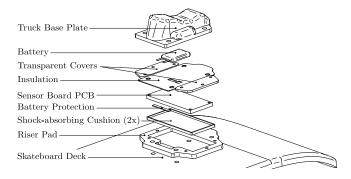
Exploded assembly drawing of the custom riser pad with the sensor module.
